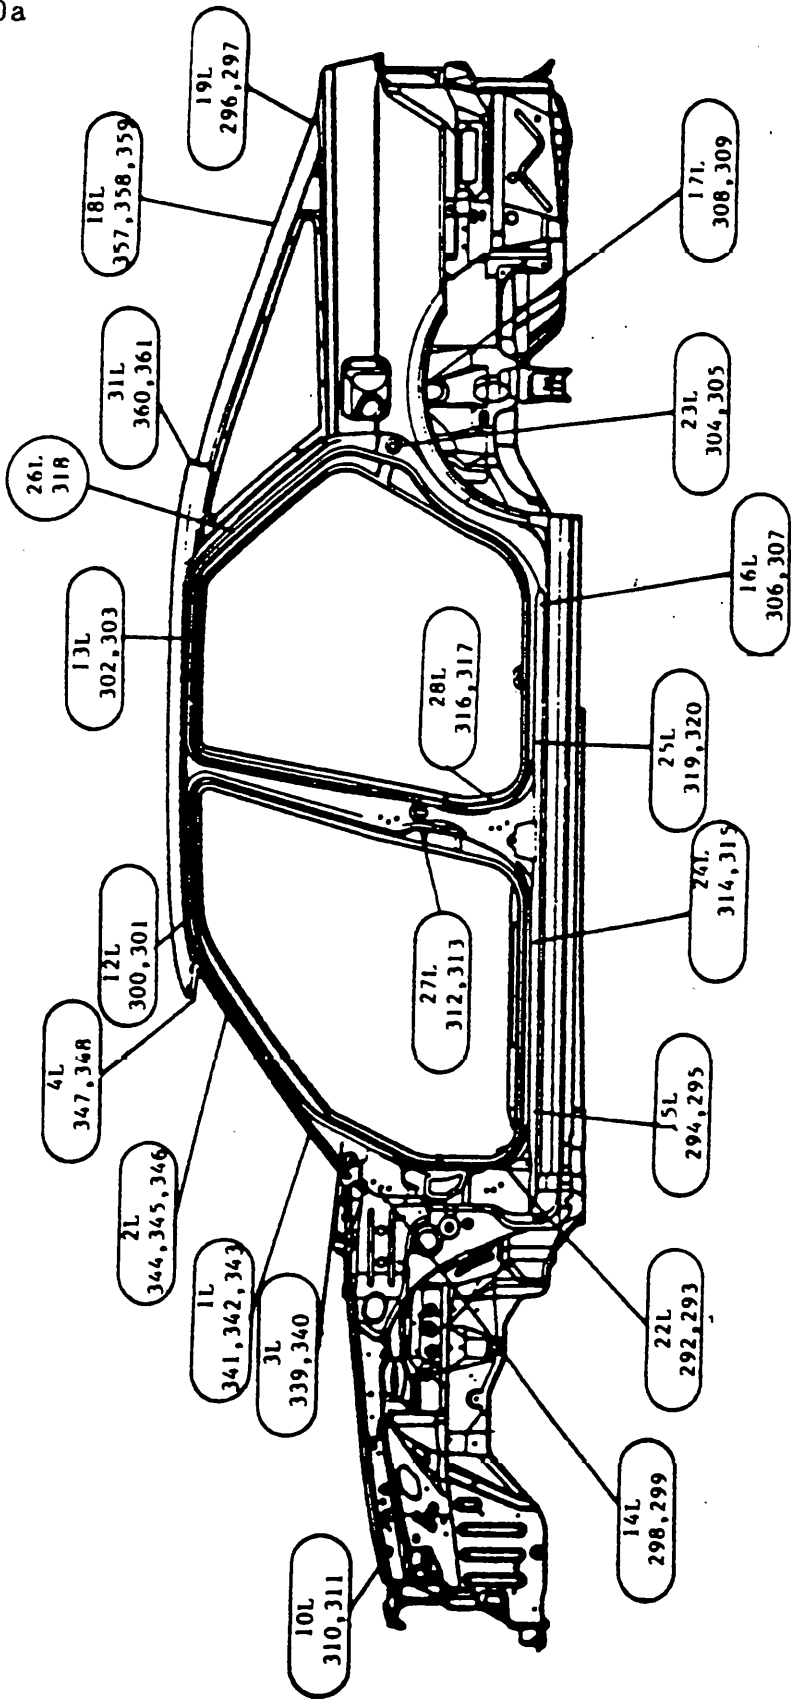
(a) Critical Body Shell Dimensions - Nearside Assembly
